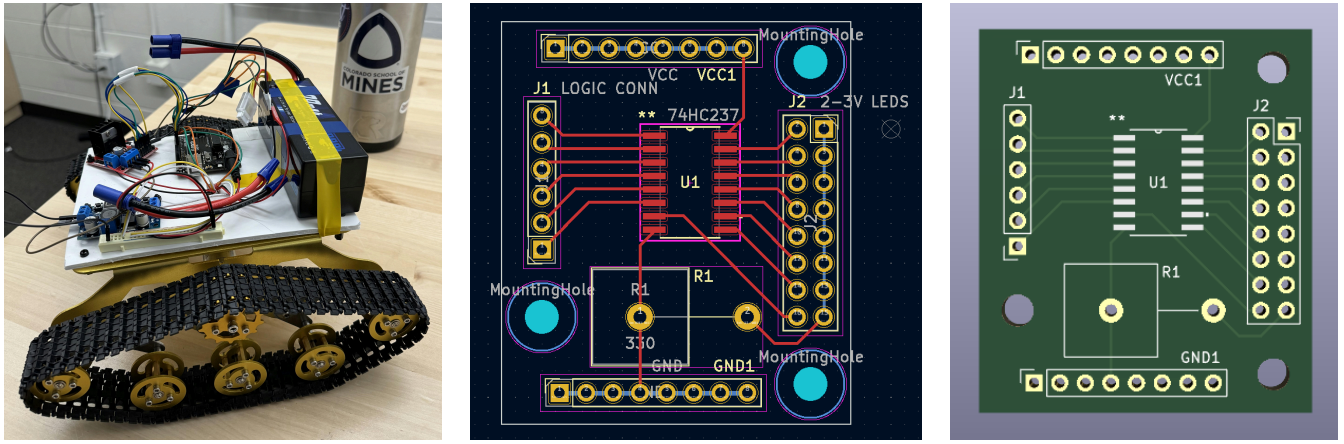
Works completed to date. (L) Prototype mechatronic system, (R) PCB design.
